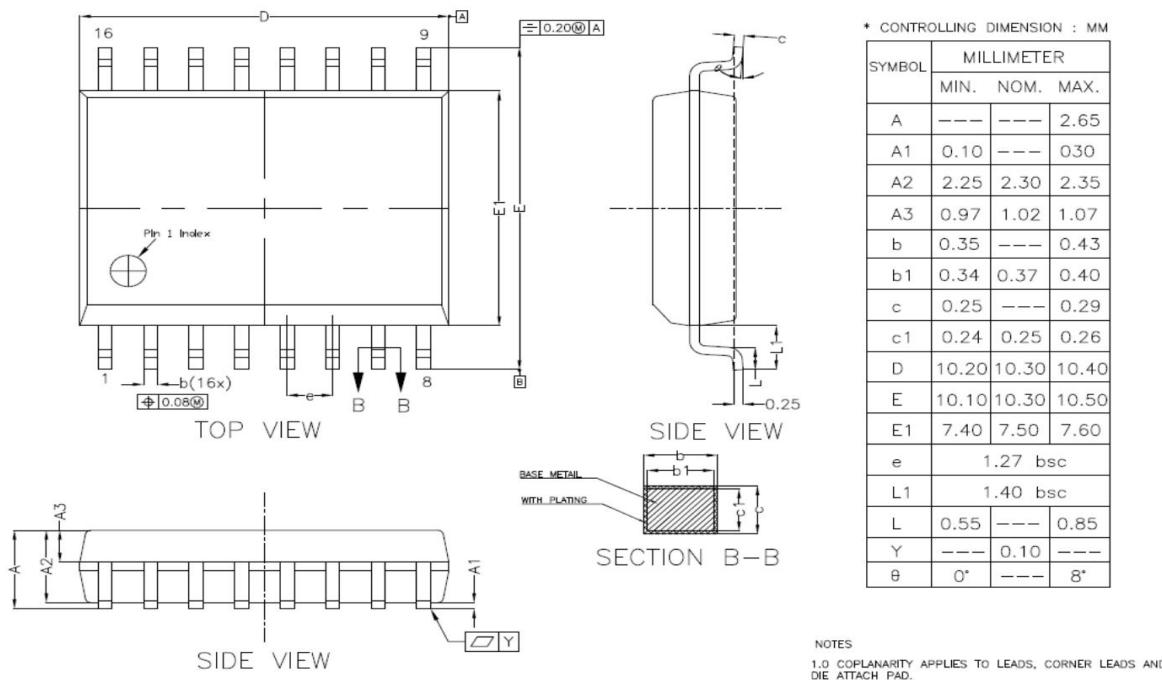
SOW16 Package Shape and Dimension in millimeters
